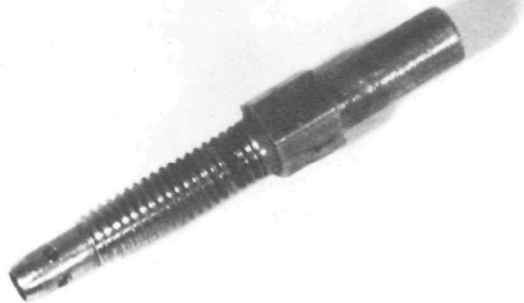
DEVICE 56 SPECIAL AIR BLEED IDLE JET
